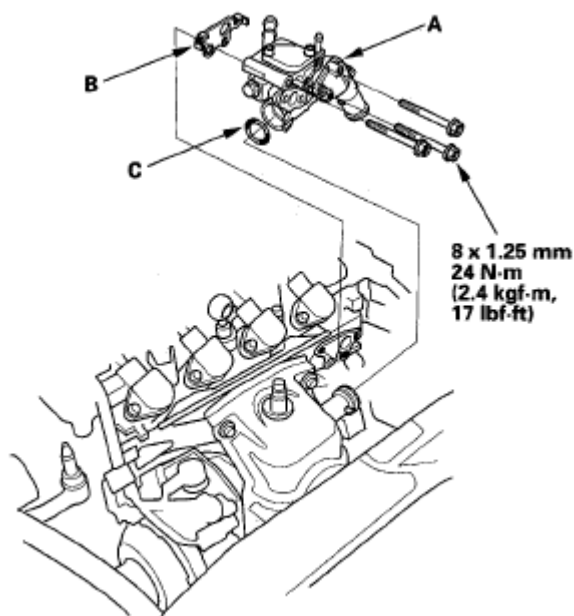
Identifying Thermostat Housing, Gasket And O-Ring
